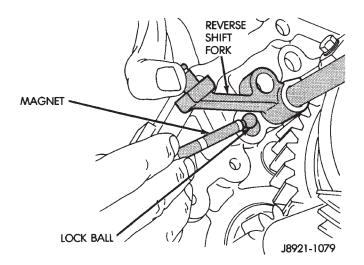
Remove Fifth Gear Shift Rail Lock Ball
